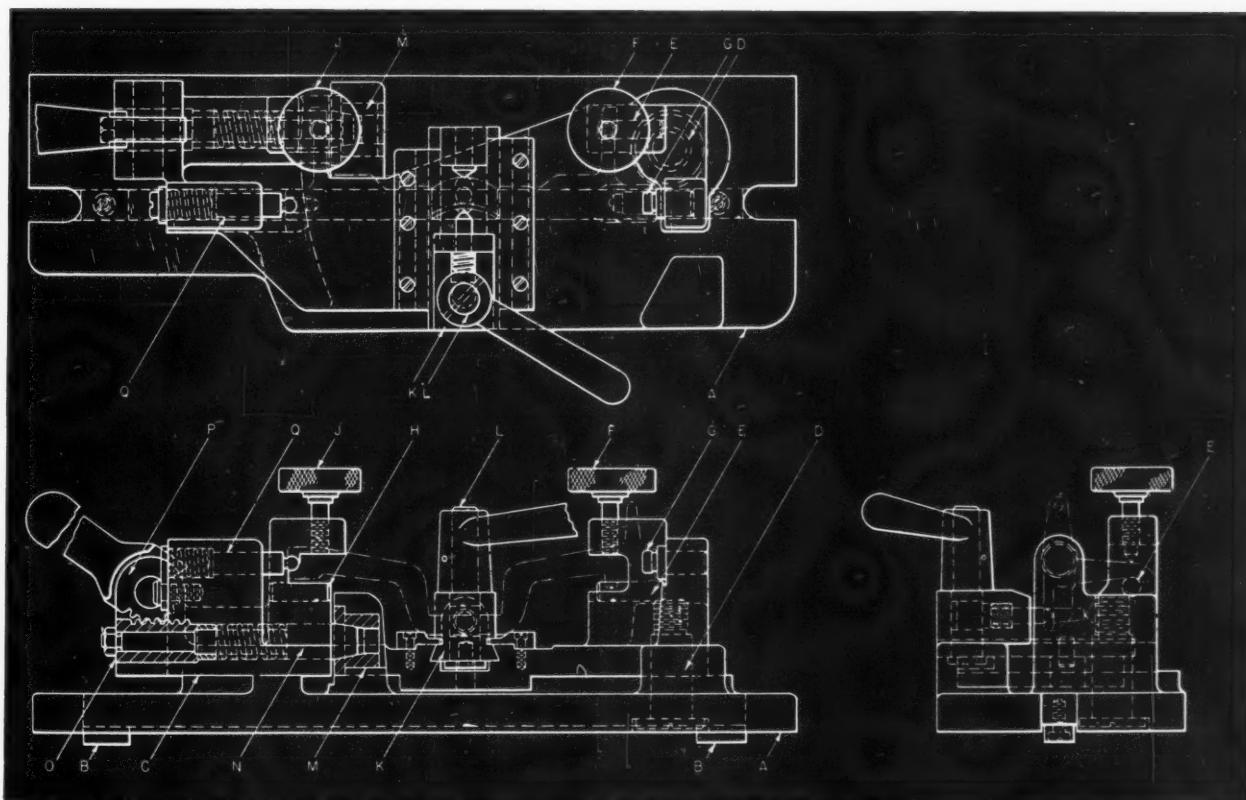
Milling fixture with positive locating members and quick-acting clamping devices designed for use in milling an unsymmetrical casting
